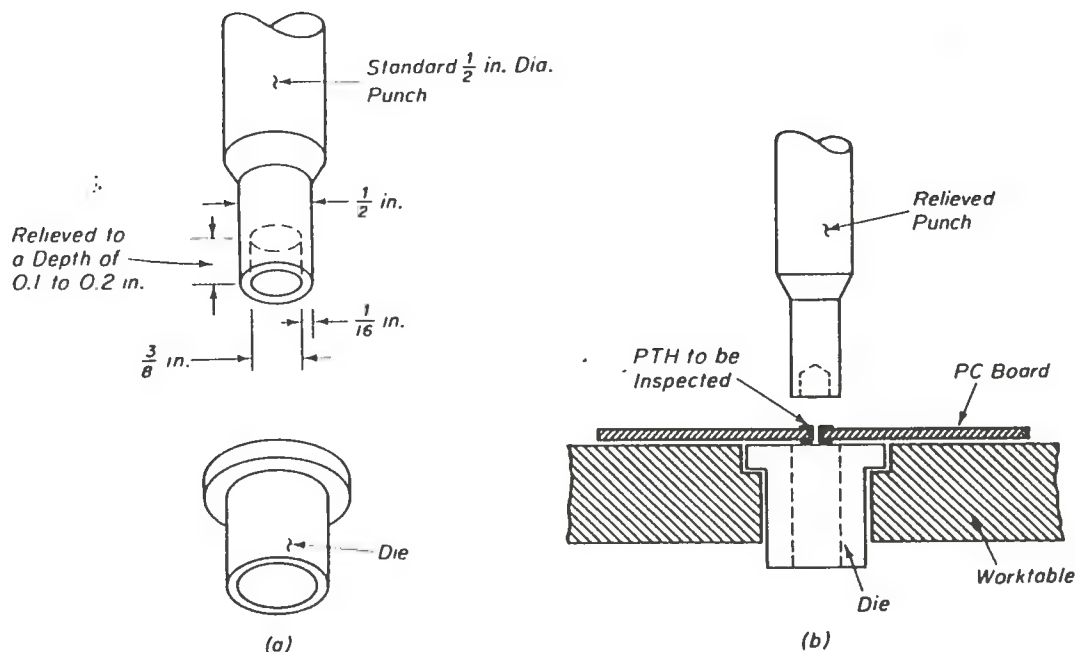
PTH specimen removal by punching: (a) specifications for relieved punch for specimen removal; (b) removing sample PTH for inspection.
